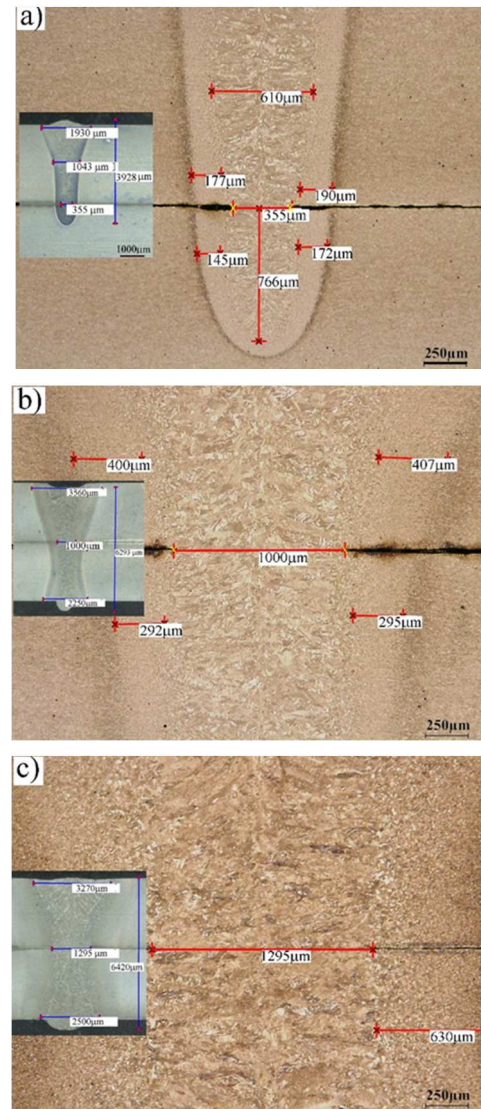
Weld geometries for (a) W1, (b) W2, (c) W3.
